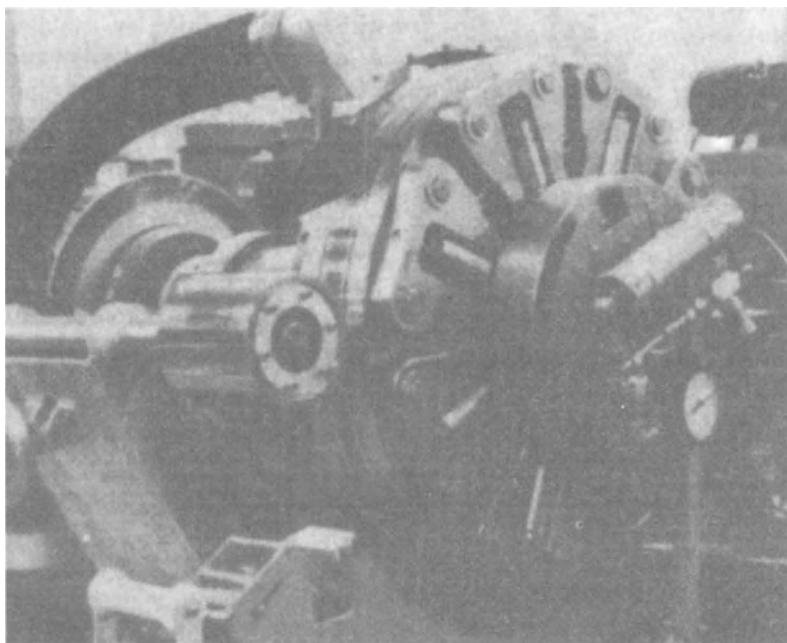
Rotating mold to produce Velcro strips continuously in a specially designed injection molding machine.
